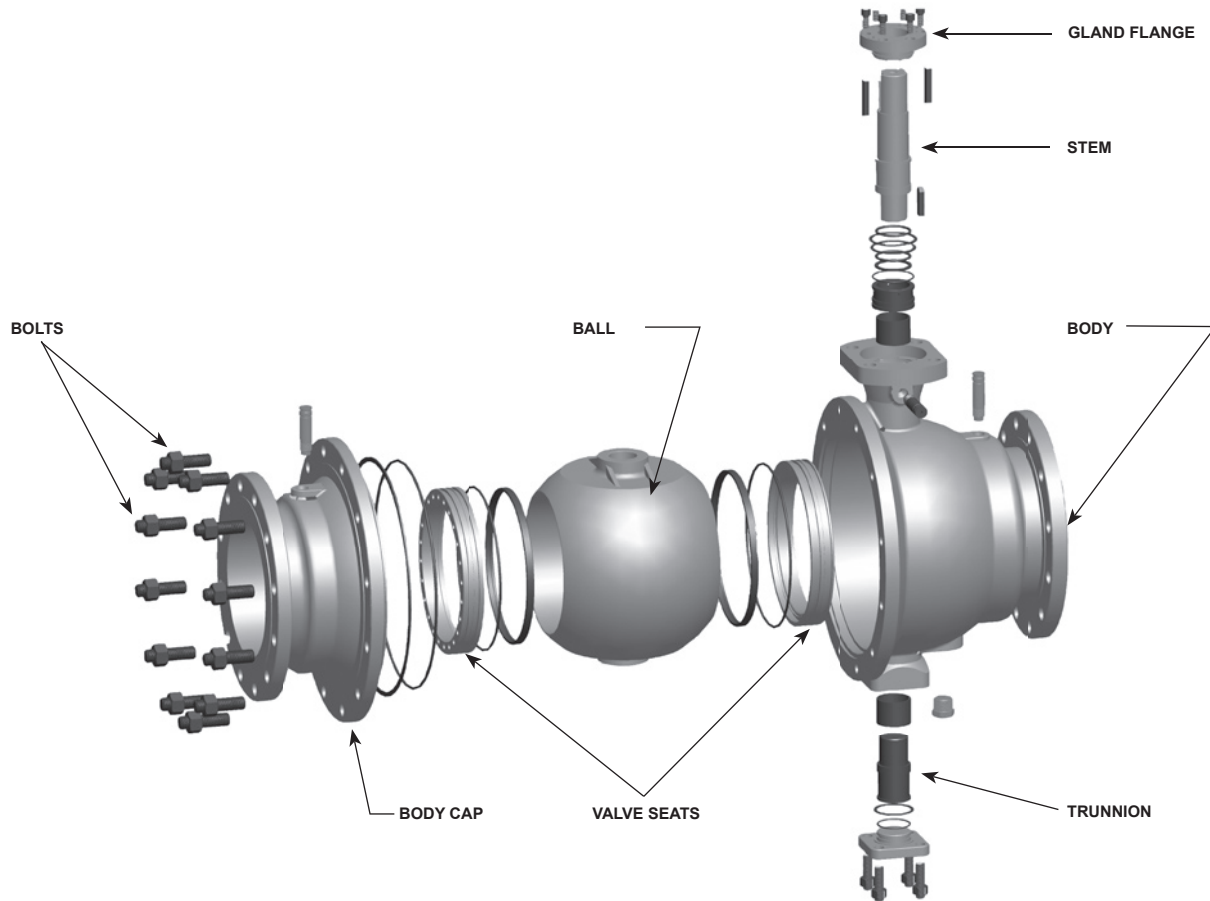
Exploded View of Tartarini™ Trunnion Mounted Ball Valve Assembly
